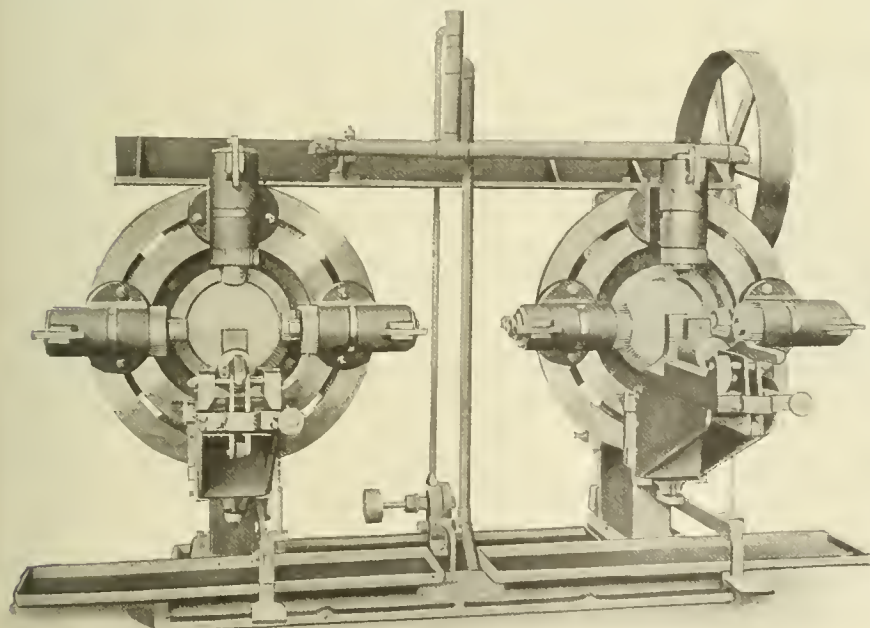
Automatic Tapping Machine, built by the Beaman & Smith Co.
